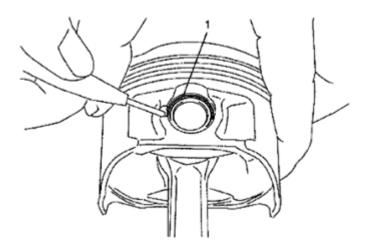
Removing Piston Pin Circlips From Connecting Rod
